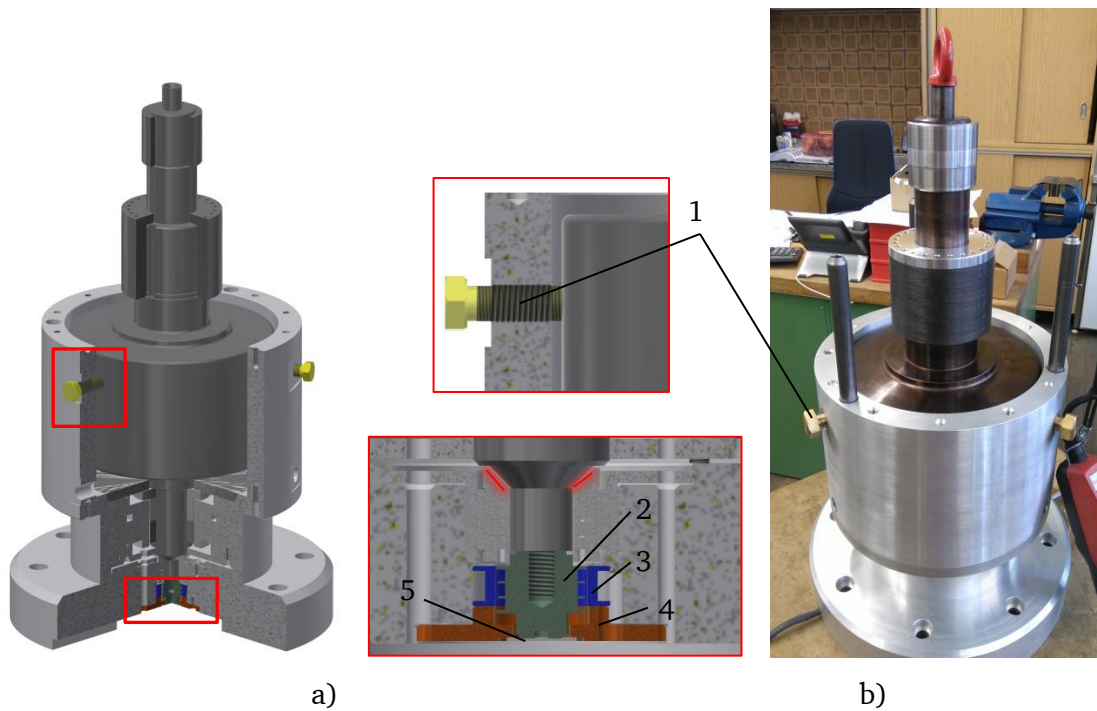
System assembly course, step 2: fix the rotor position, 1-fixing bolt, 2-axial position sensor (rotor part), 3-axial position sensor (stator part), 4-end plate for fixation, 5-revolution sensor (stator part): a) *Autodesk Inventor 2018* [47], b) prototype
